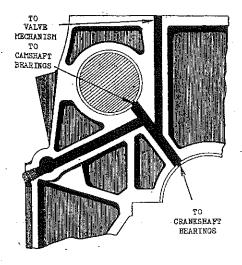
Oil holes in bearings must line up with oil feed holes in crankcase on all engines. Illustration shows 278, 308, 361, 426, 451 and 477 engines
